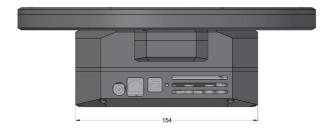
G4 camera head with External filter wheel bottom view dimensions
